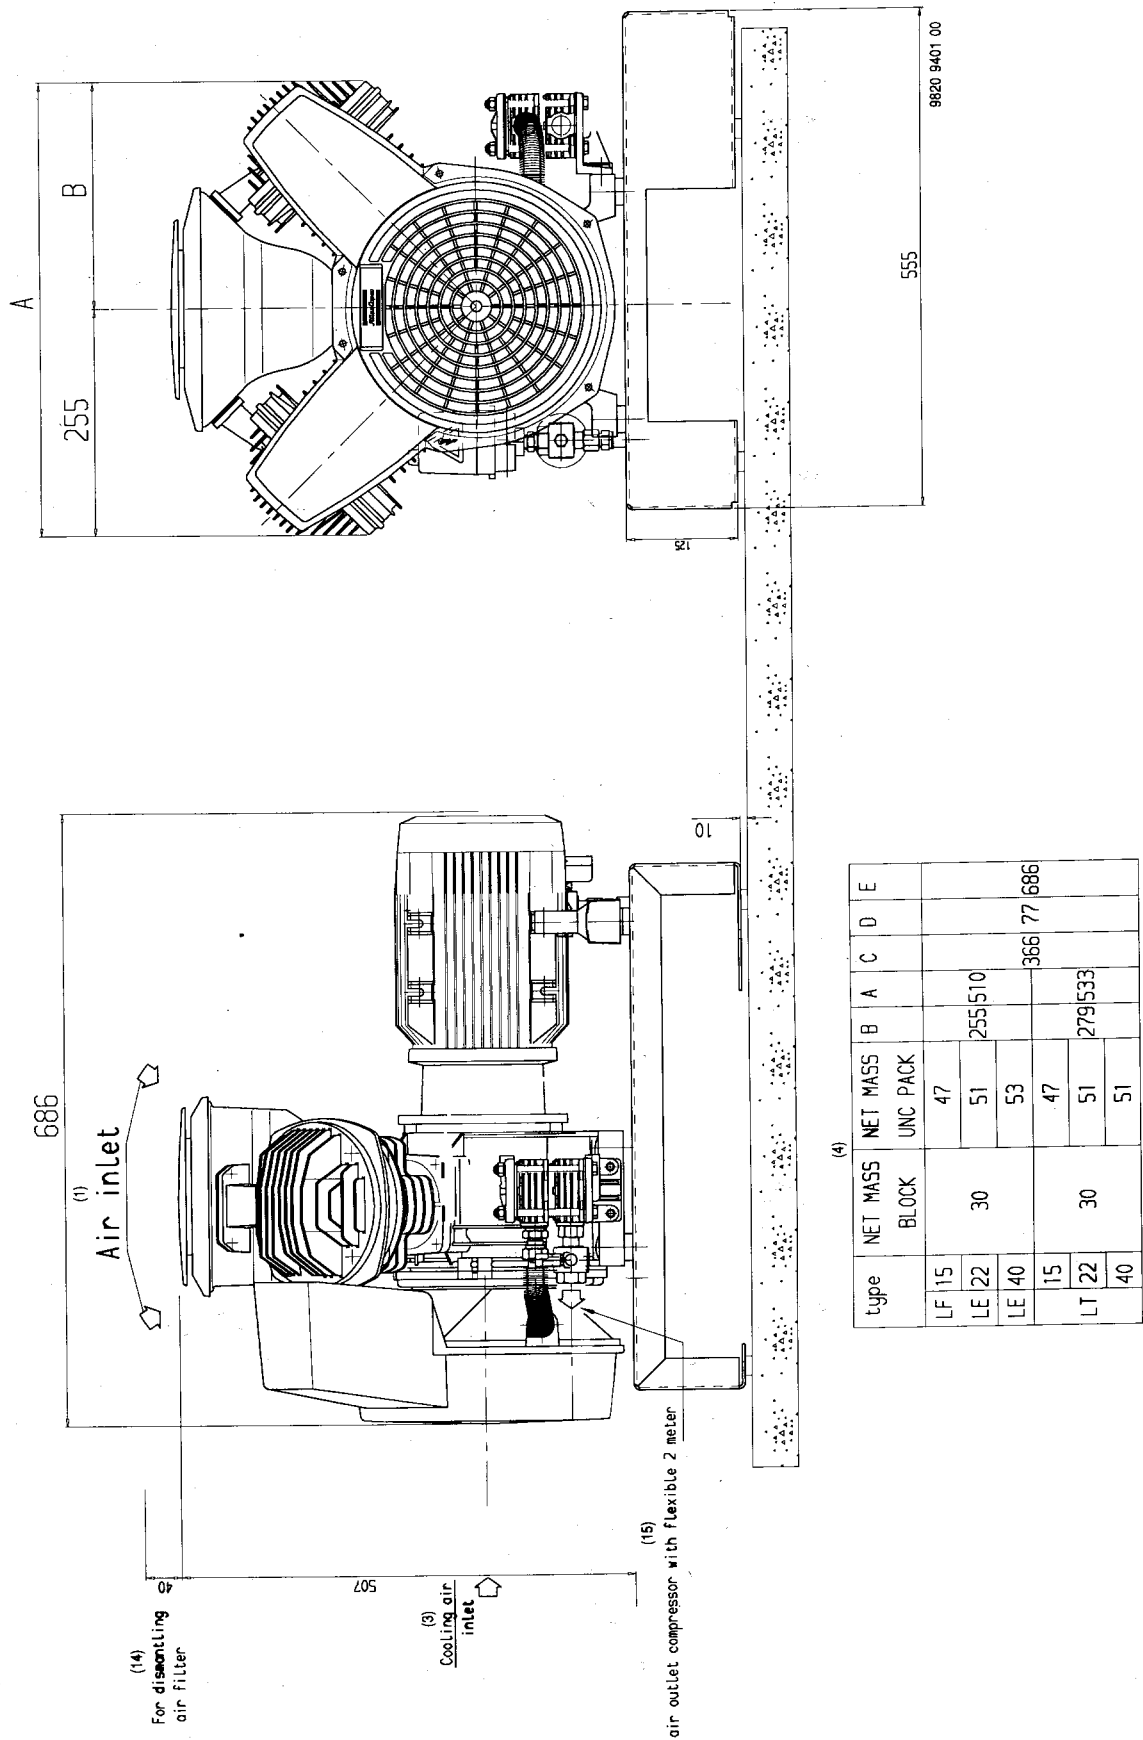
Dimension drawing, LE/LT15 up to -40 Unsilenced Pack
